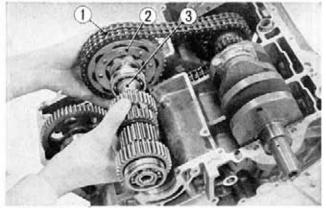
(1) Primary chain ② Primary sprocket ③ Transmission mainshaft
